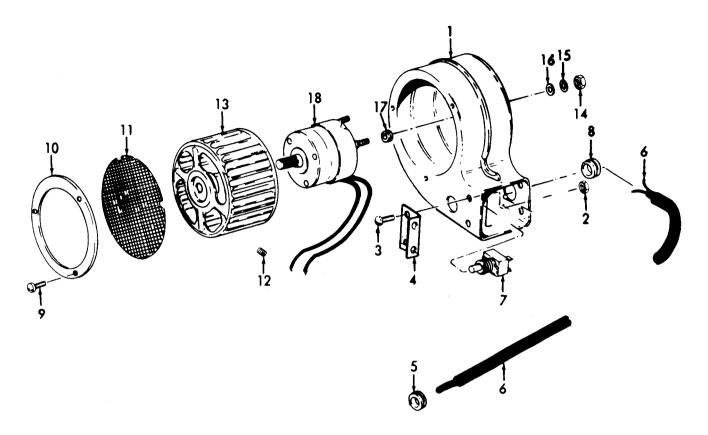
Rear Ventilator Fan Assembly, Removal and Installation.
